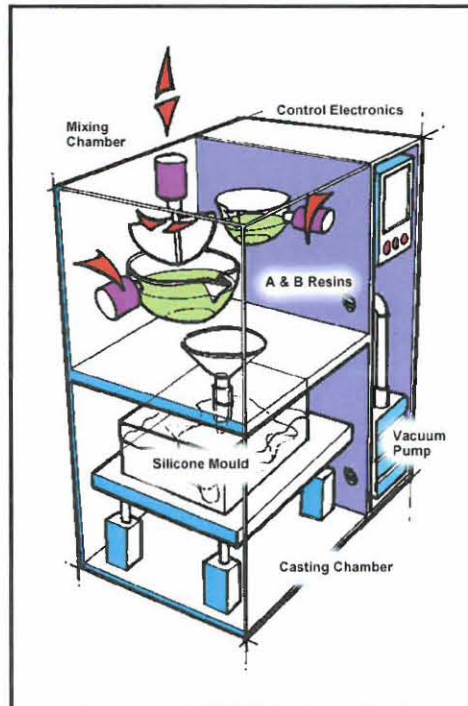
Typical Configuration of a Vacuum Casting System for RTV
